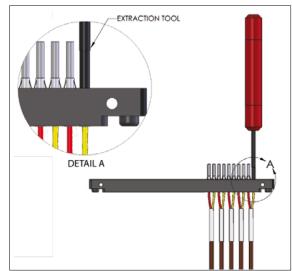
Figure C. Ensure that the tool is kept perpendicular to the module face to avoid damage to the contact or tool.
